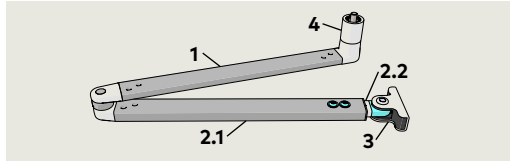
J12 – Splined push arm assembly, 500 mm, 8" - 12" reveal
